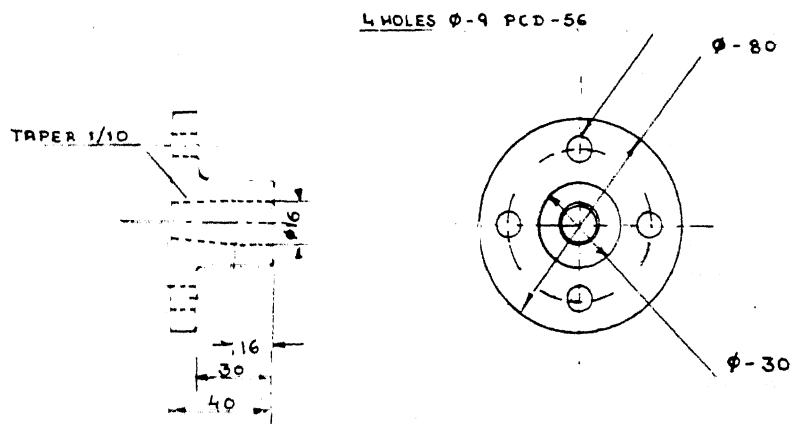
MOTOR SHAFT EXTENSION P.No. 9
